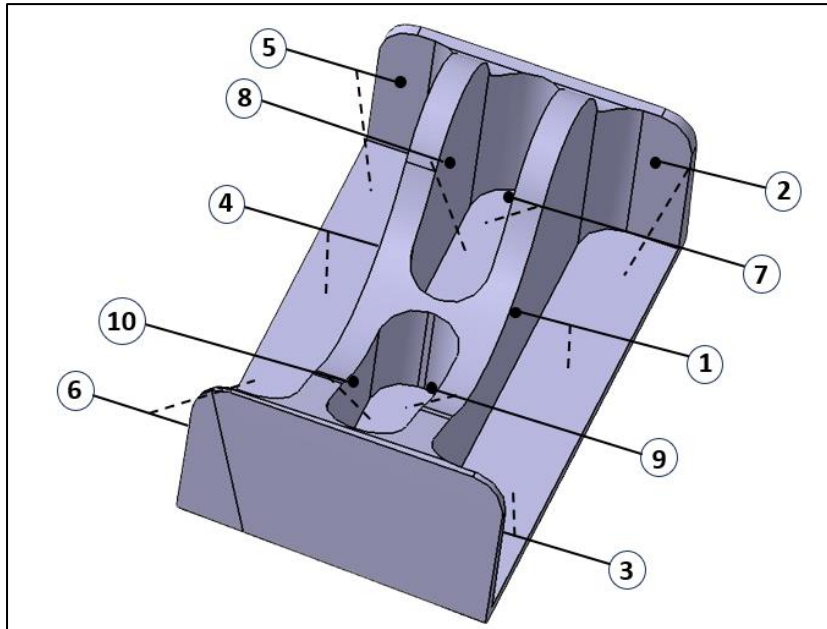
Points taken for dimensional accuracy of the *perpendicularity* aspects.
